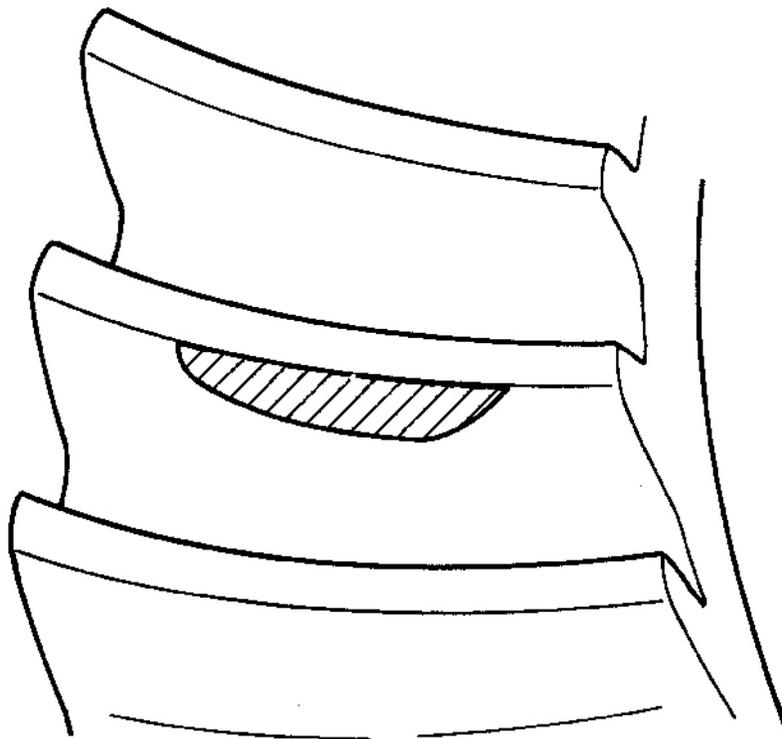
Identifying Drive Side Toe & Coast Side Toe
